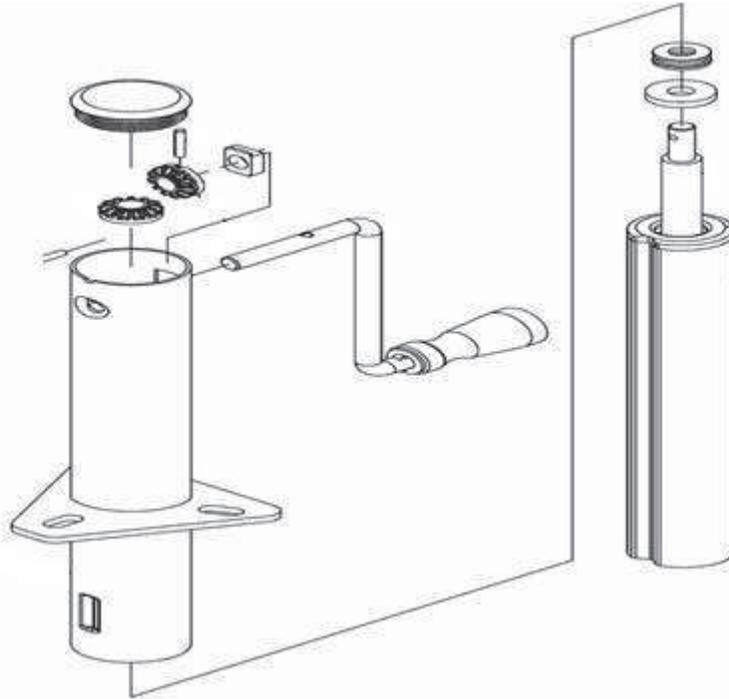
Assembly drawing of a trailer jack. Source: Ultra-Tow. “Side-Wind Trailer Jack” [Online]. Available: <http://www.northerntool.com/images/downloads/manuals/603635.pdf>
